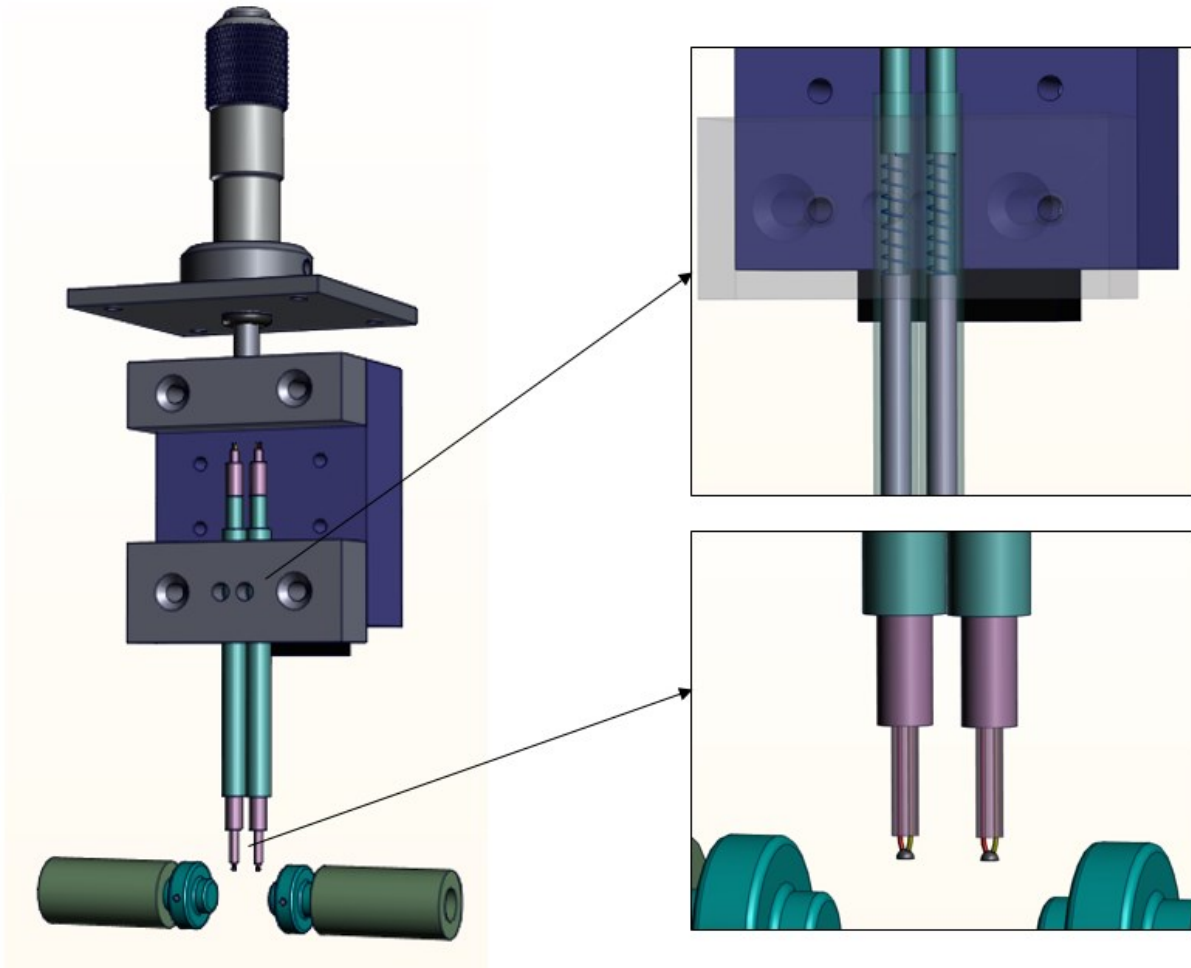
Overview of the thermocouple probes positioning mechanism.
